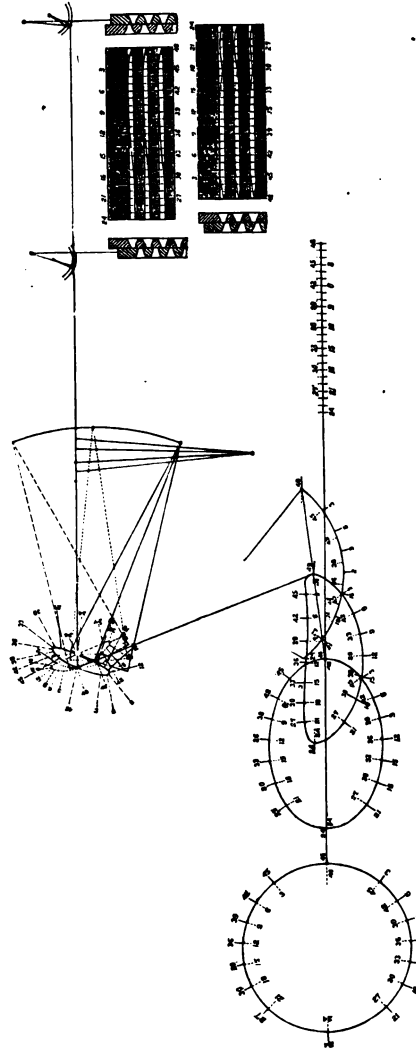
P. STRONG'S PATENT VALVE GEAR AND VALVES. General Disposition.
